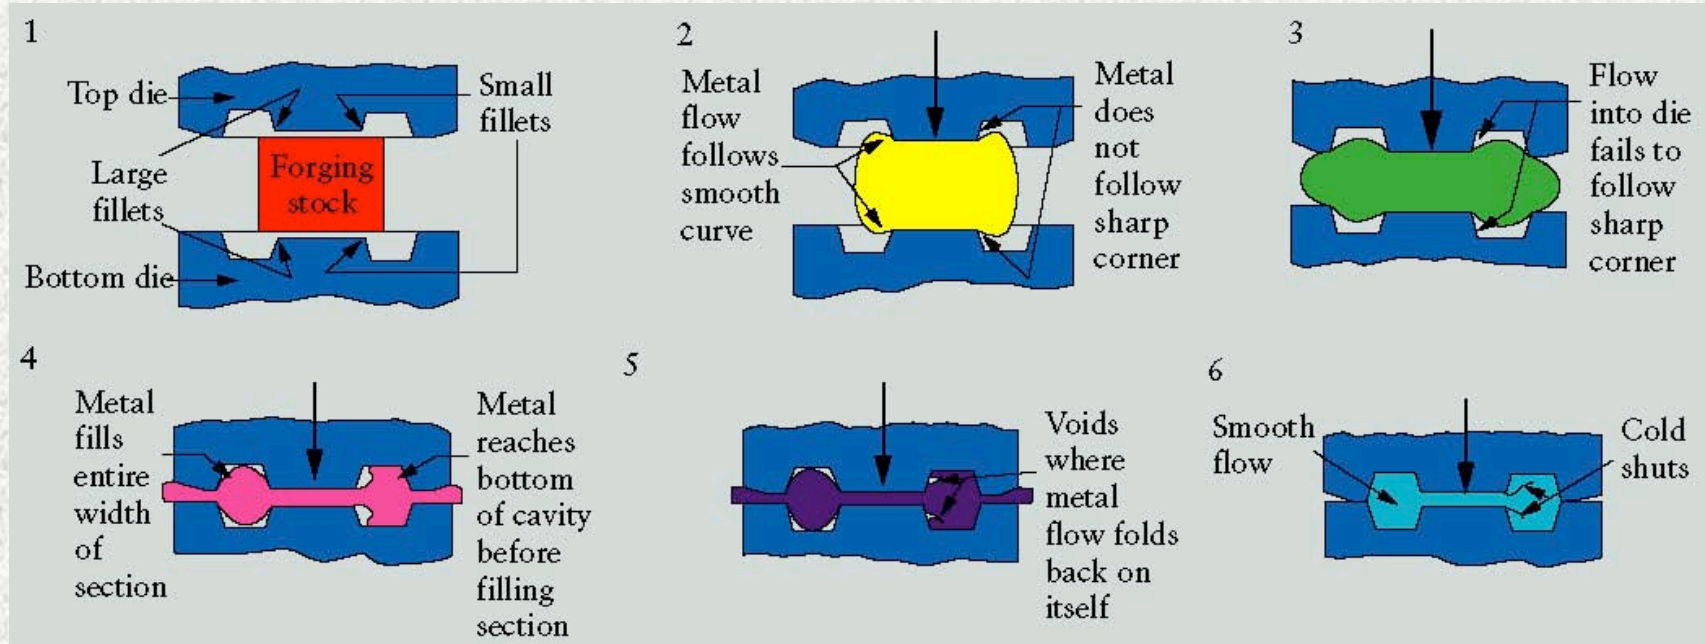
Effect of fillet radius on defect formation in forging. Small fillets (right side of drawings) cause the defects. *Source:* Aluminum Company of America.
